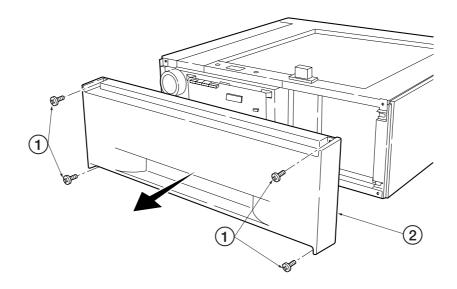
Removing the rear cover (250-sheet cassette paper feeder)
